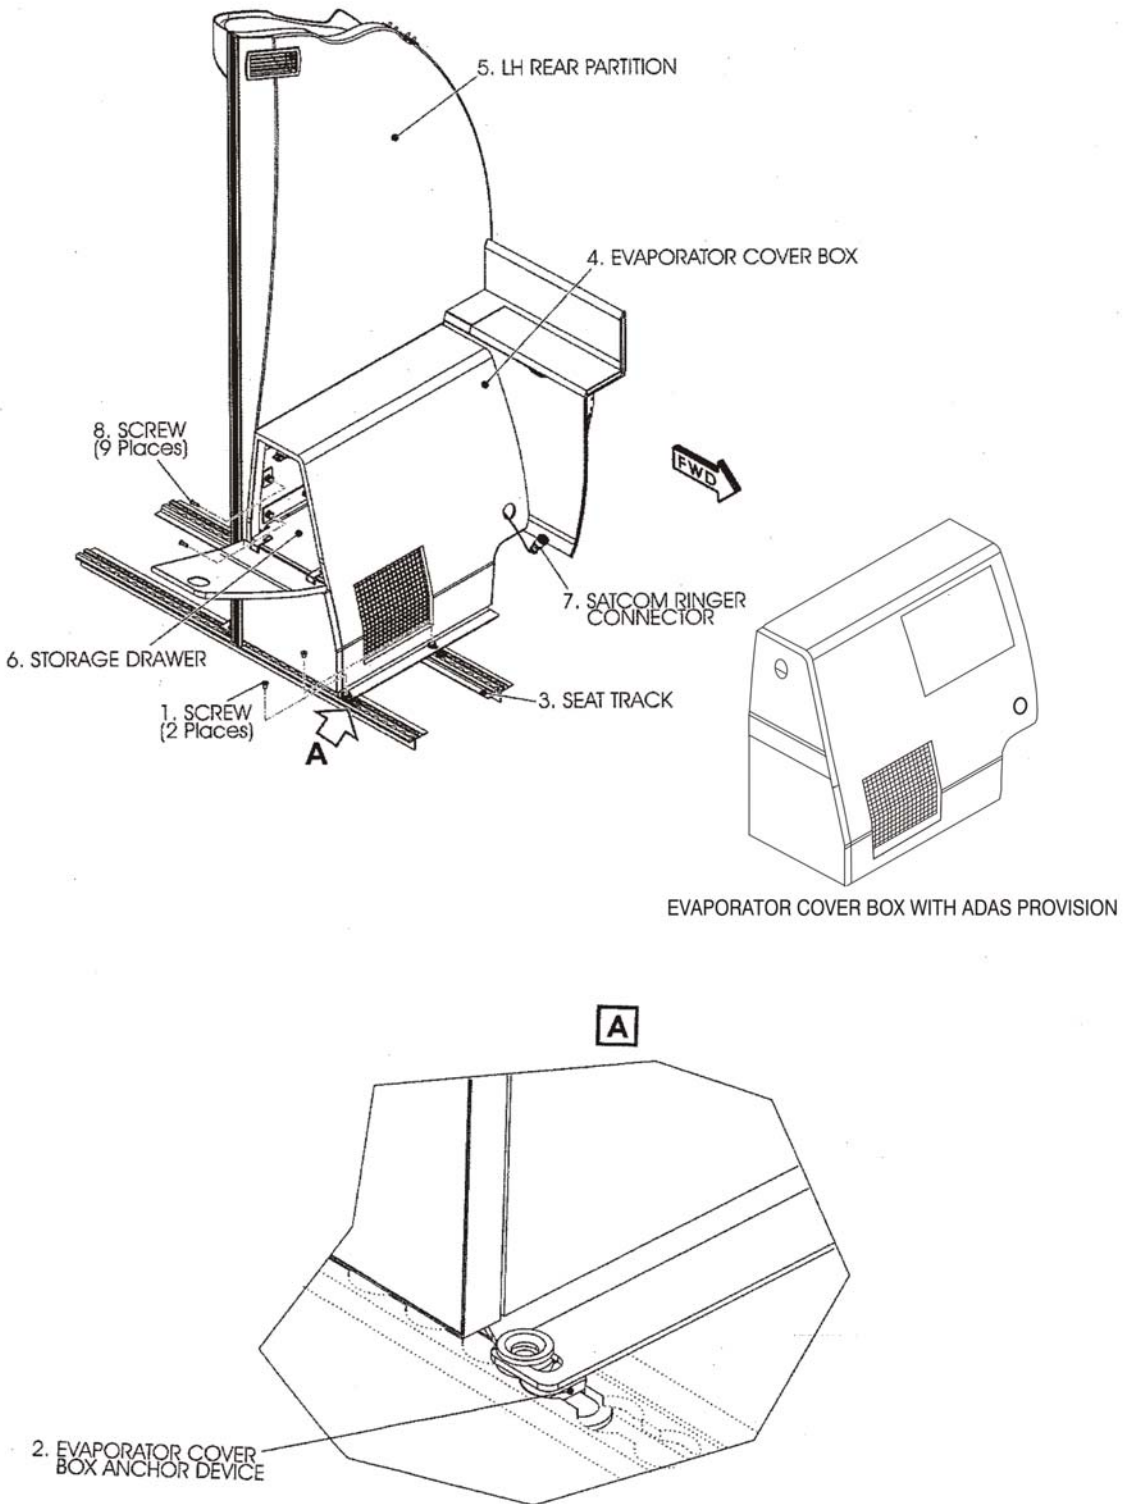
Evaporator Cover Box (NORDAM) - Removal / Installation
